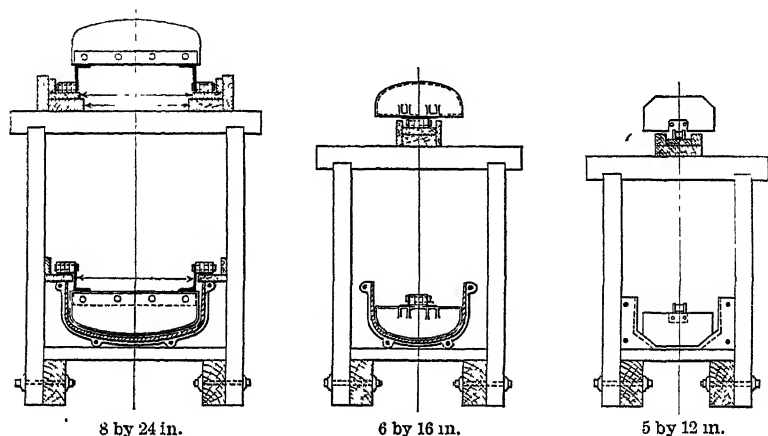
CROSS-SECTIONS OF SINGLE- AND DOUBLE-STRAND CONVEYORS.
